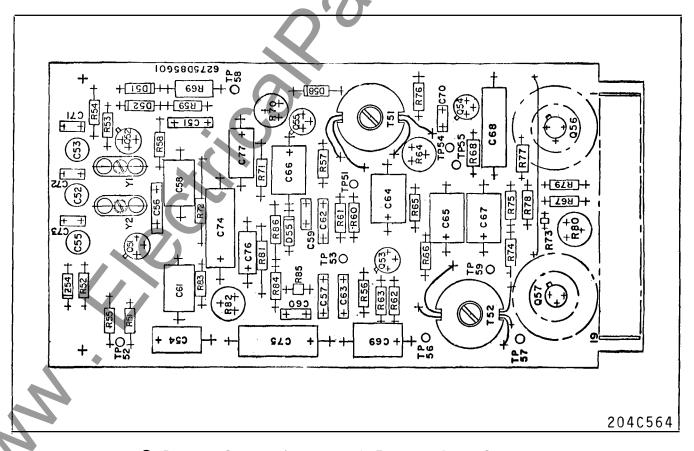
Component Locations of the Transmitter Printed Circuit Board.
